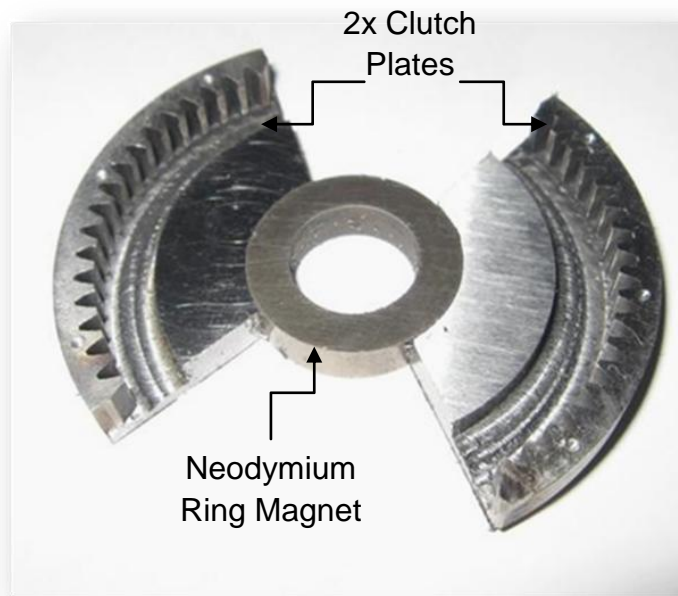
Machined Bottom Clutch Plate & Ring Magnet
